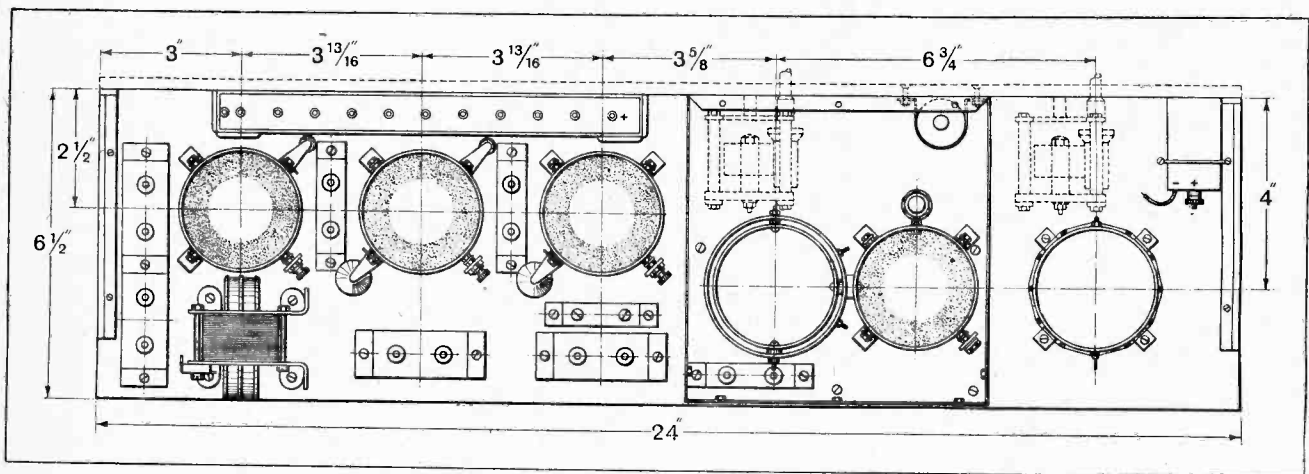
Dimensional drawing showing the layout of the components on the baseboard.
